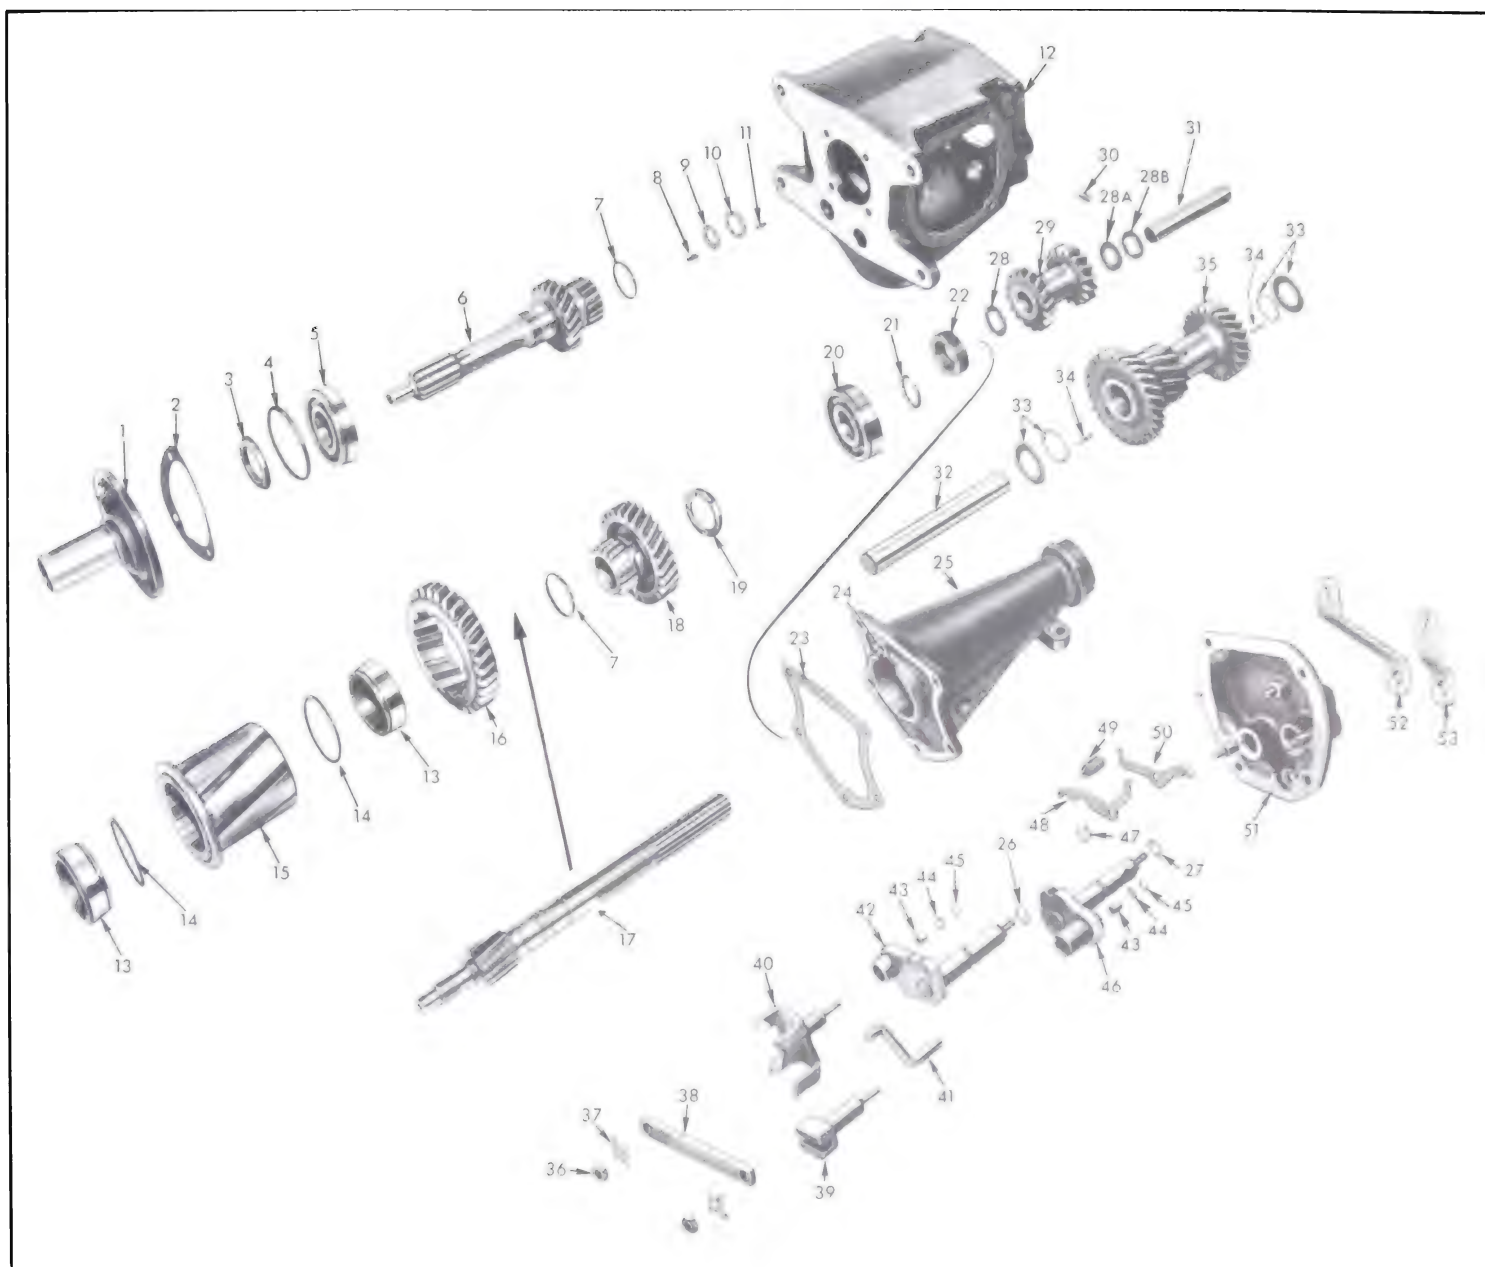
Exploded View of 3-Speed Synchromesh Transmission
